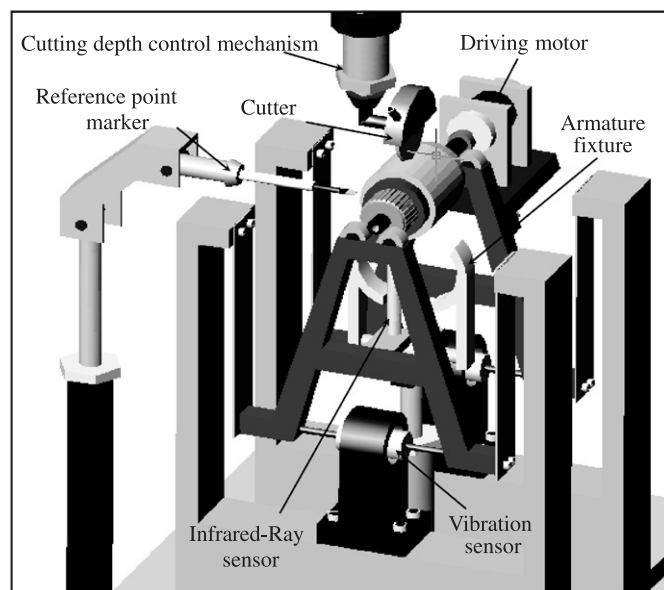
Configuration of hardware components in unbalance measurement and milling machine.
